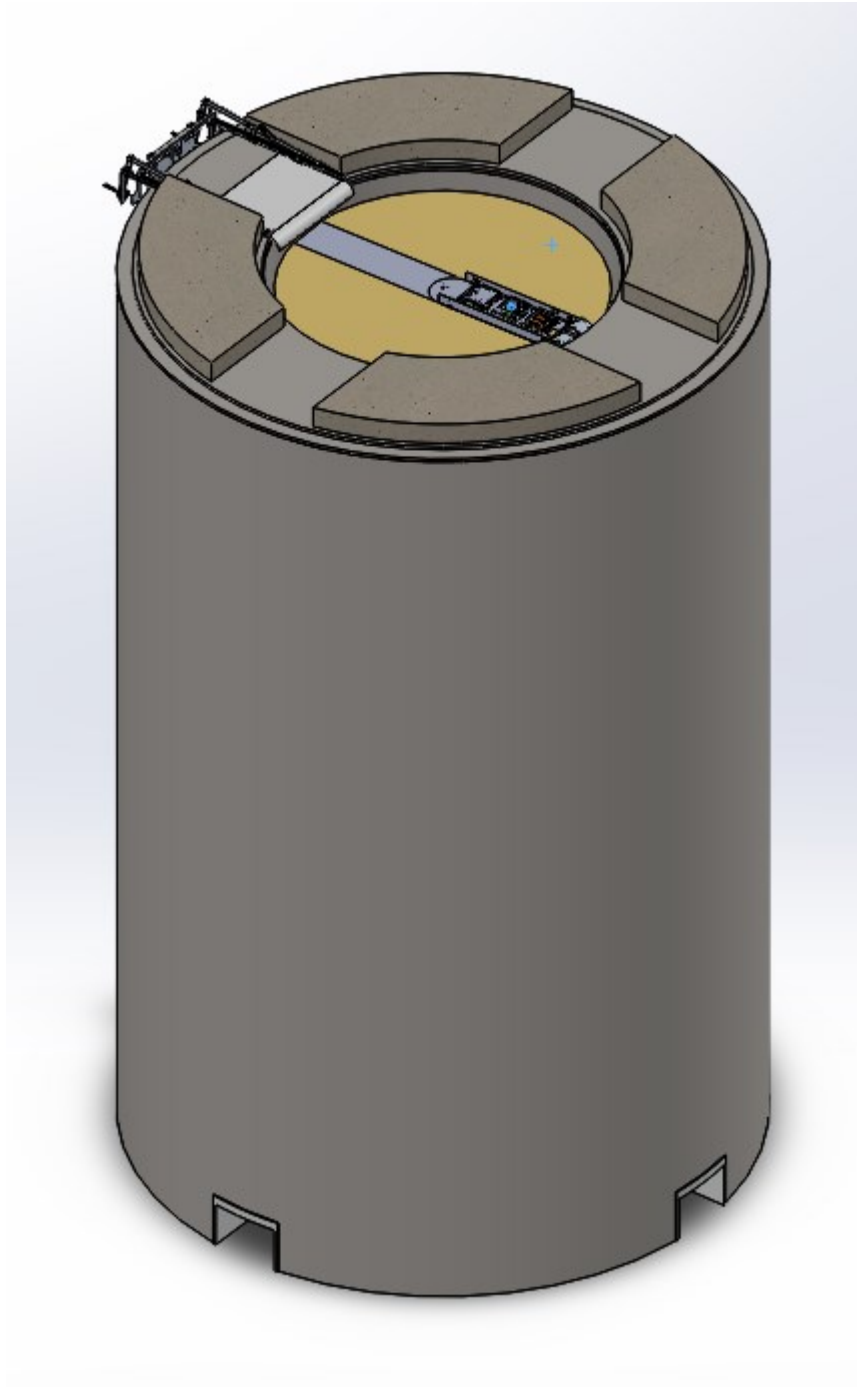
The robotic inspection system CAD model of the cask, sensor cars, insertion arm, vent mount, and winch, with the lower portion of the overpack visible. The insertion arm is deployed in the straight position atop the canister, within the overpack.
